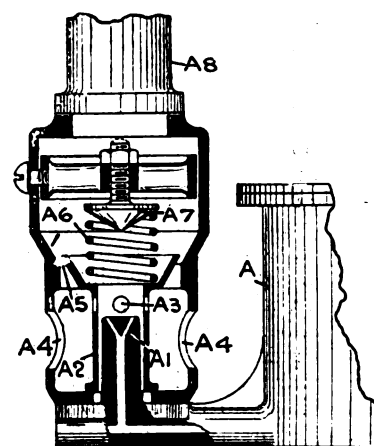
Sectional elevation through the mixing chamber of the carburettor, showing the sliding sleeve, A^2 , over the jet, A^1 .
